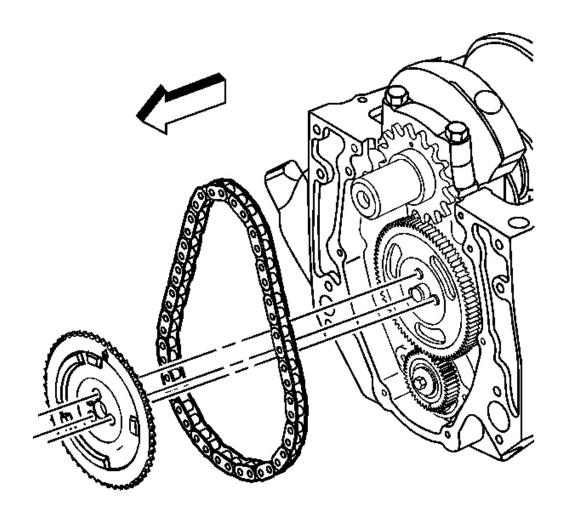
Camshaft Sprocket And The Camshaft Timing Chain Courtesy of GENERAL MOTORS CORP.
